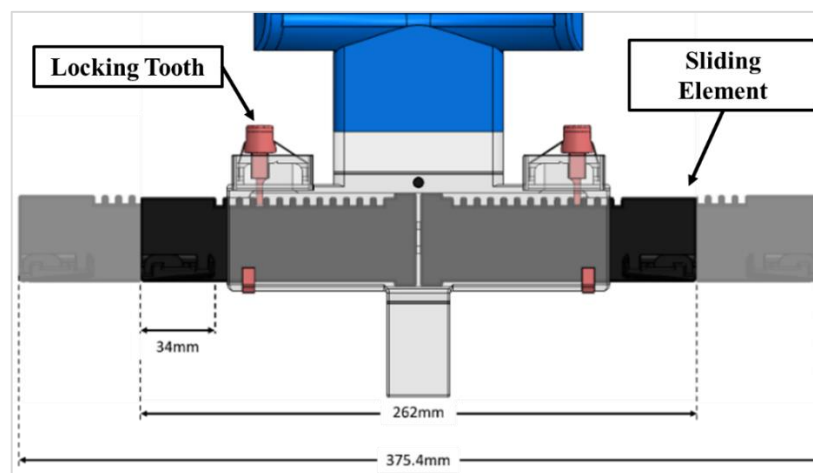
Closed and Extended Dimensions of the Assembly on the Sliding Elements' Adjustment
